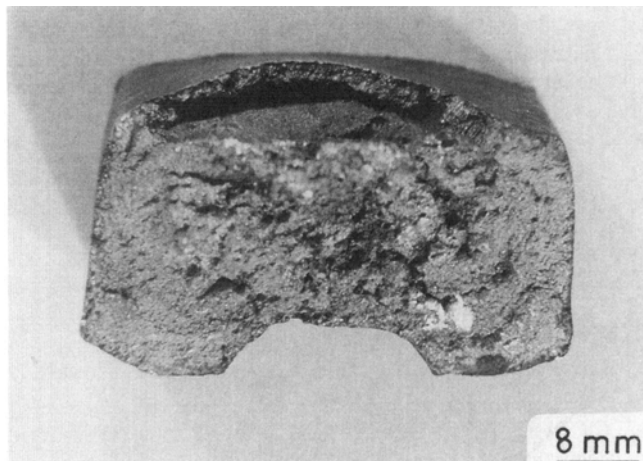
Macroview of blistering in a defective Al-7Si-0.3Mg squeeze-cast crank
